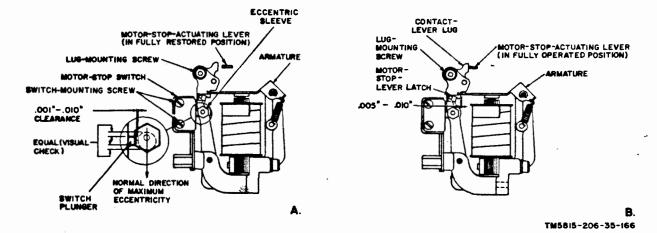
Motor-stop contact-lever spring assembly and relay coil adjustments (TT-4B/TG).
